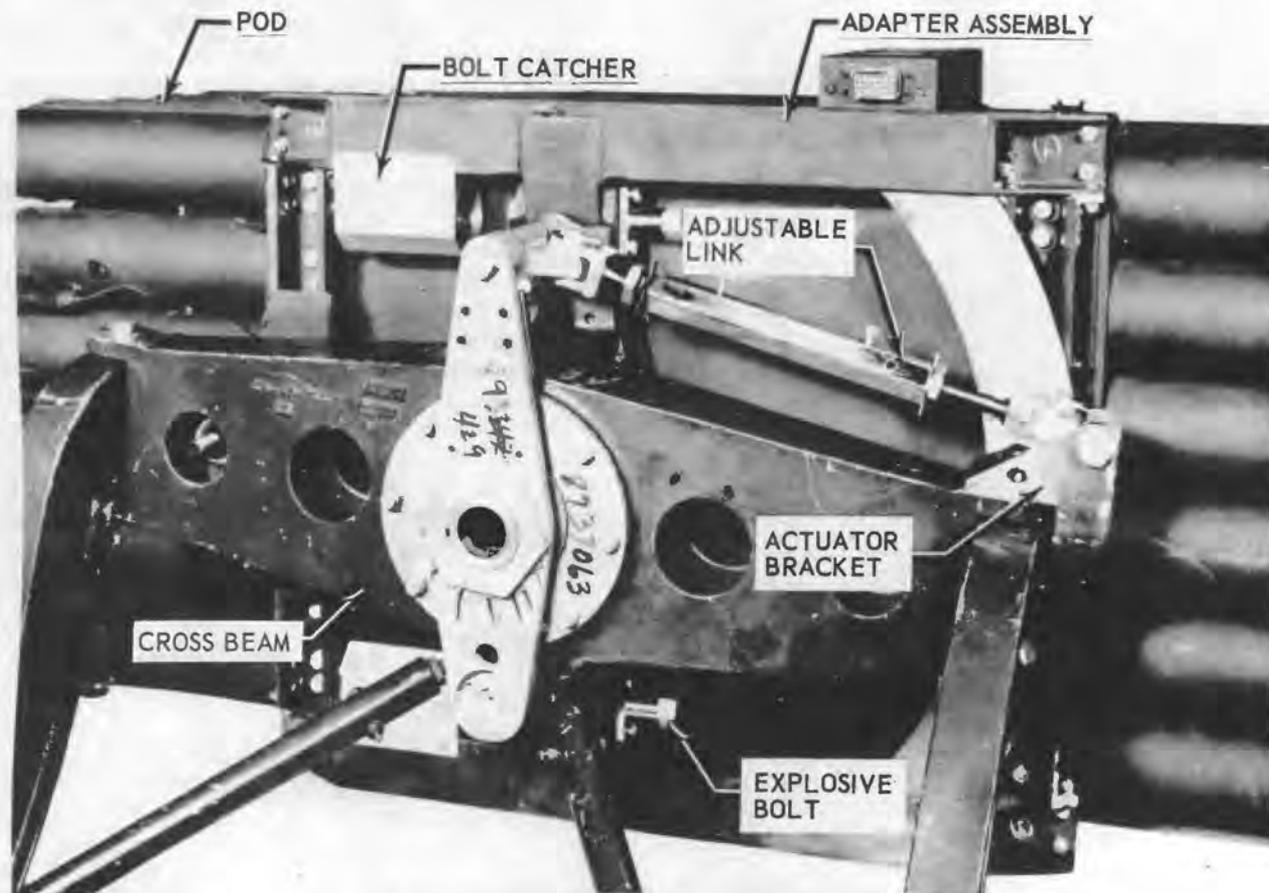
XM3 Rocket — crank and crossbeam assembly
